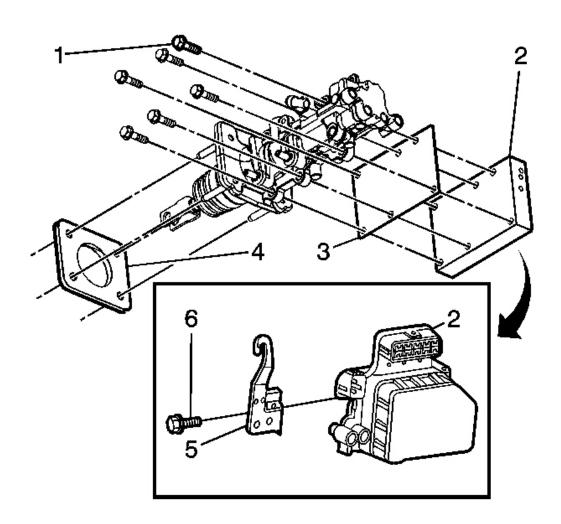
View Of Brake Pressure Modulator Valve & Bolts Courtesy of GENERAL MOTORS CORP.
